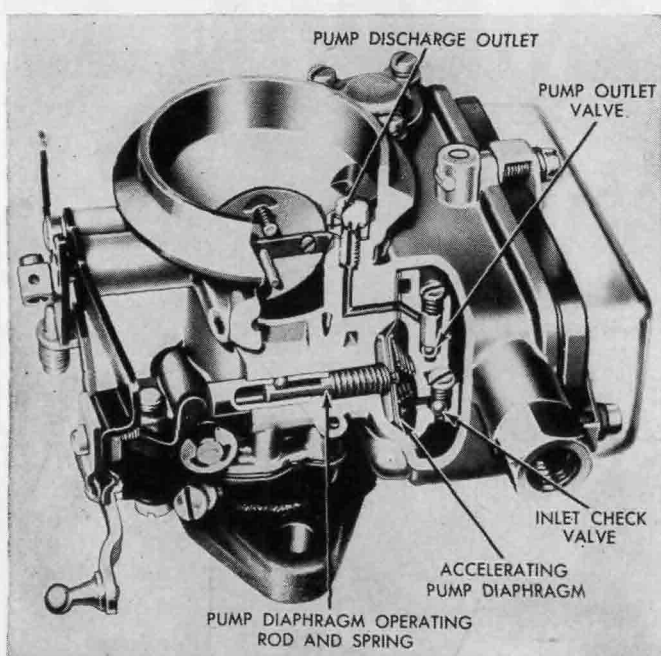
Carburetor cut away so accelerating system can be seen. (*Ford Motor Company*)
